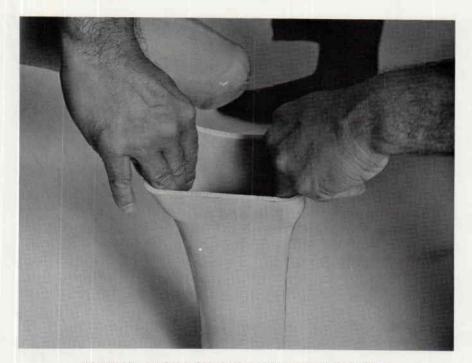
Stretching One End of the Tube into a Conical Shape.
